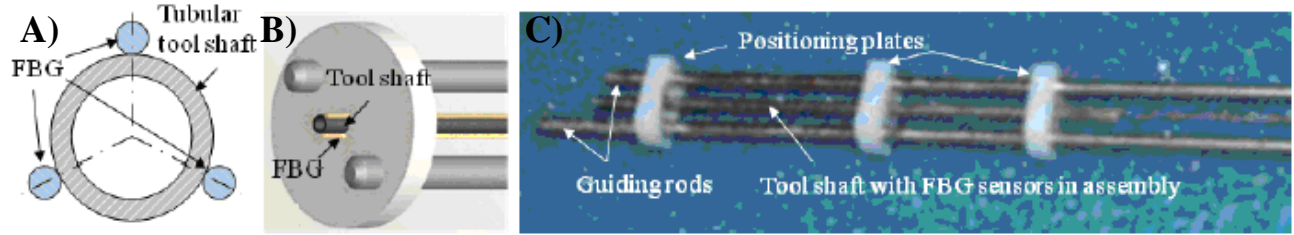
Fiber attachment method (a) section view of the tubular tool shaft with the FBG sensors; (b) close-up of the guiding jig for FBG alignment; and (c) the guiding jig in assembly [27].
